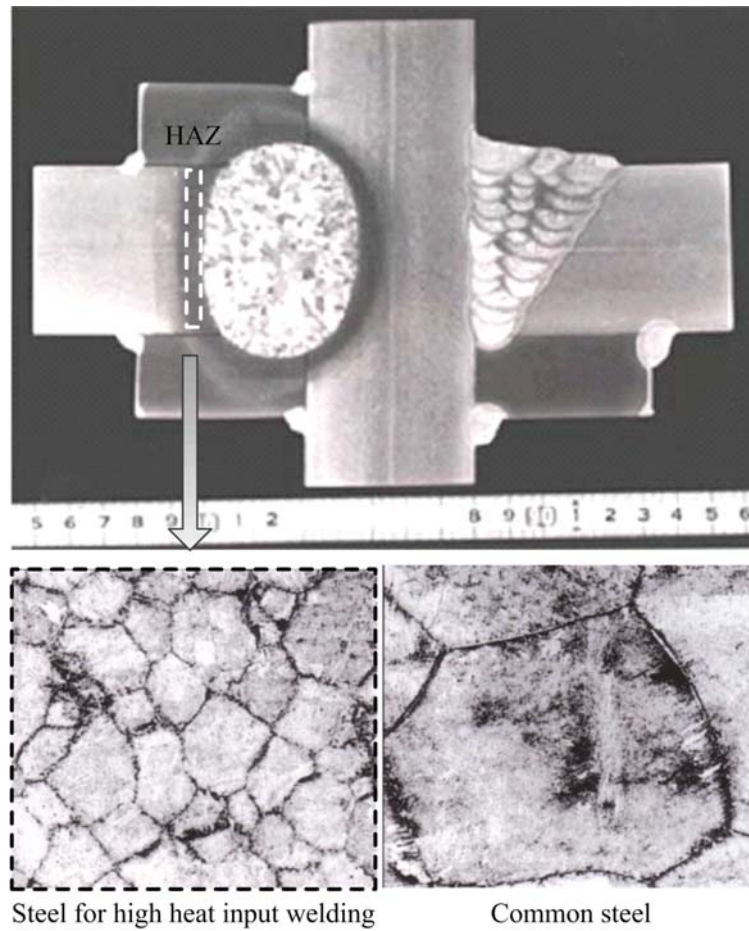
Application of Steel for High Heat Input Welding (adapted from [36])
